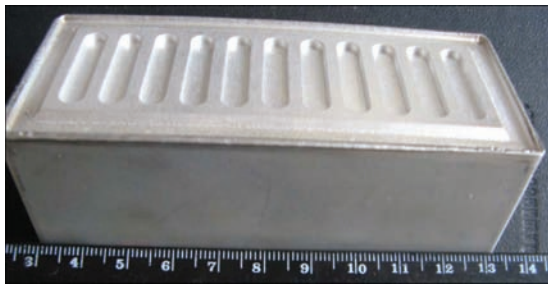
Appearance of welds produced on curved trajectory using instrument for manual laser welding
